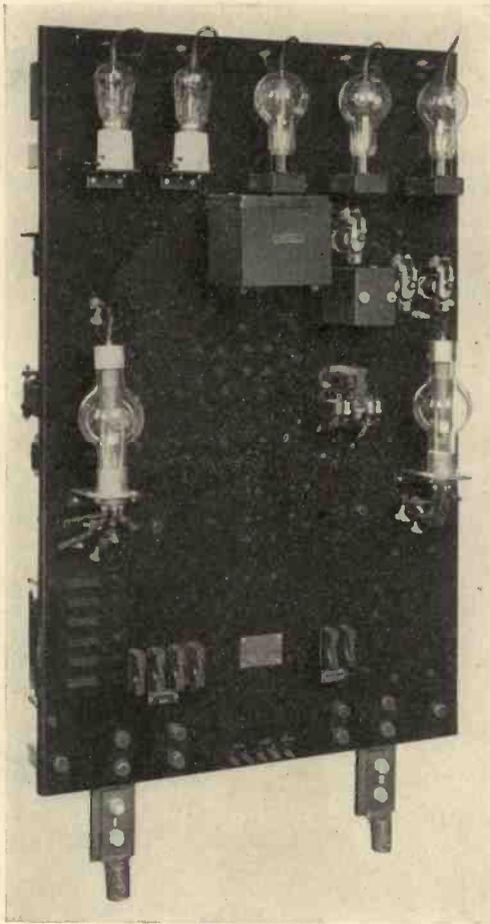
Front view of B.T.H. welder control panel.
